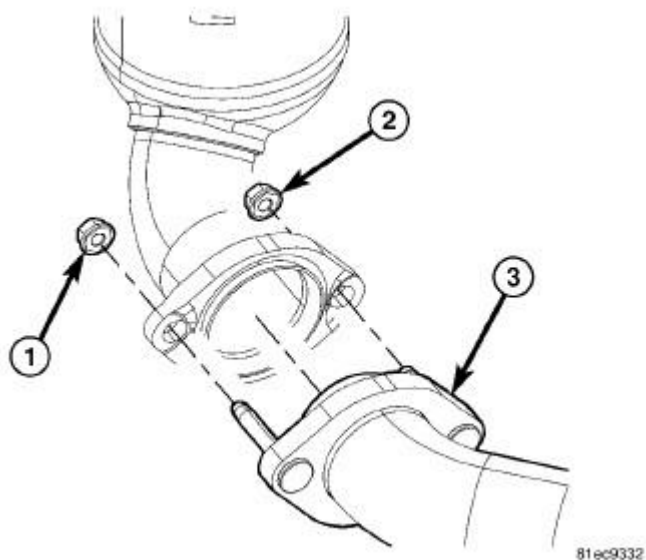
Front Maniverter-To-Cross Under Fasteners
